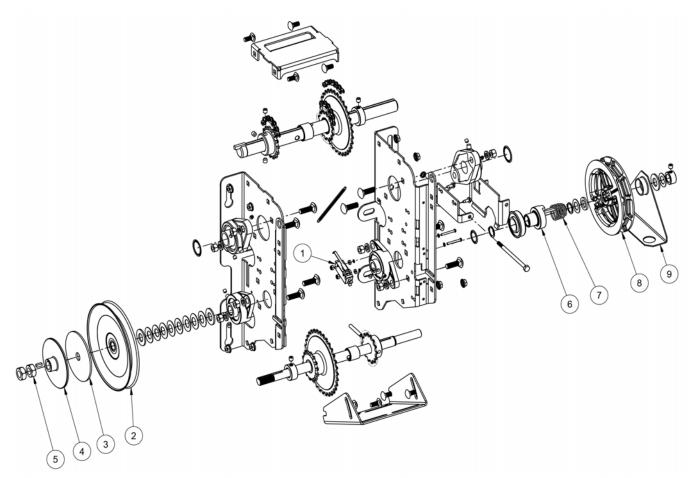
Rapido™ RSH Frame Mechanical Exploded View
